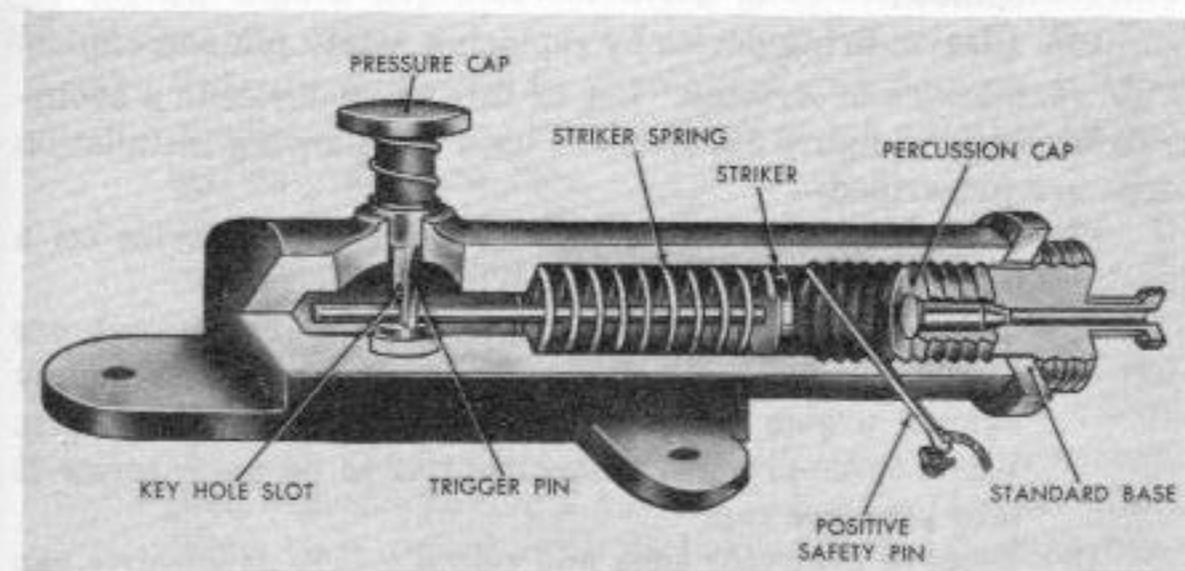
Cutaway view of firing device, pressure type, M1A1.
